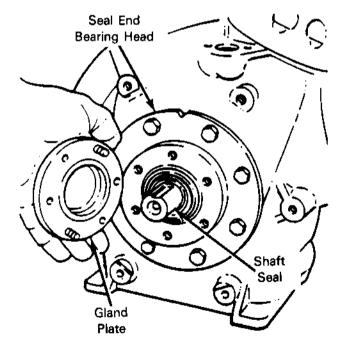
Shaft Seal Positioned In Seal End Bearing Head
